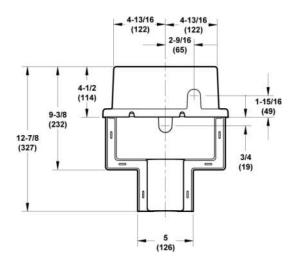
Dimensions of 599-10071 Weather Shield in Inches (Millimeters).
